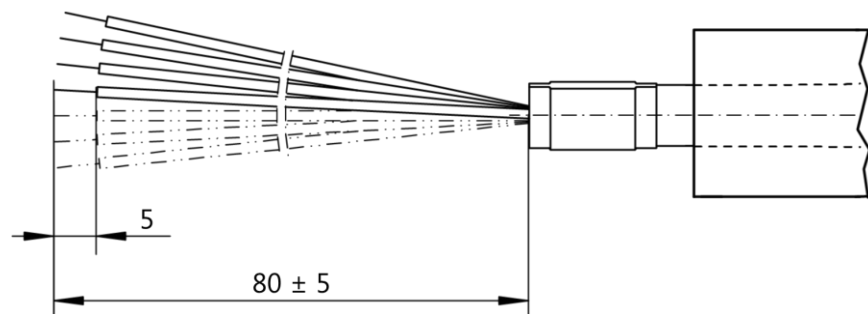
/13: Connection with cable strands (X3 = a), protective tubing (X10 = hc)
